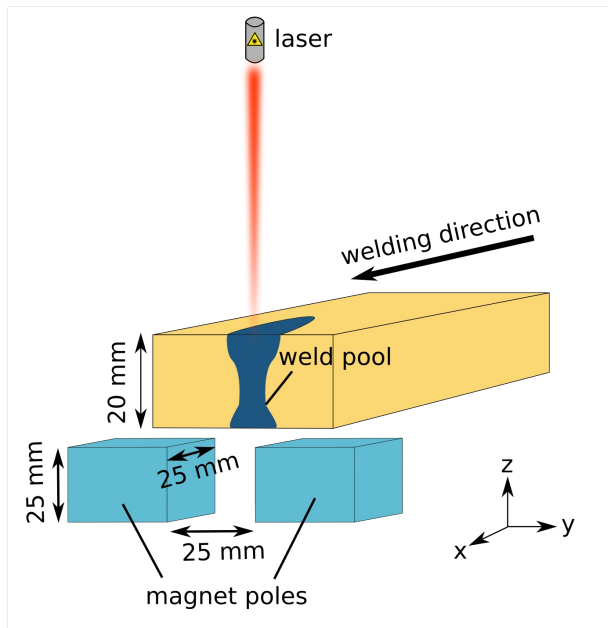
Sketch of the electromagnetic weld pool support.
